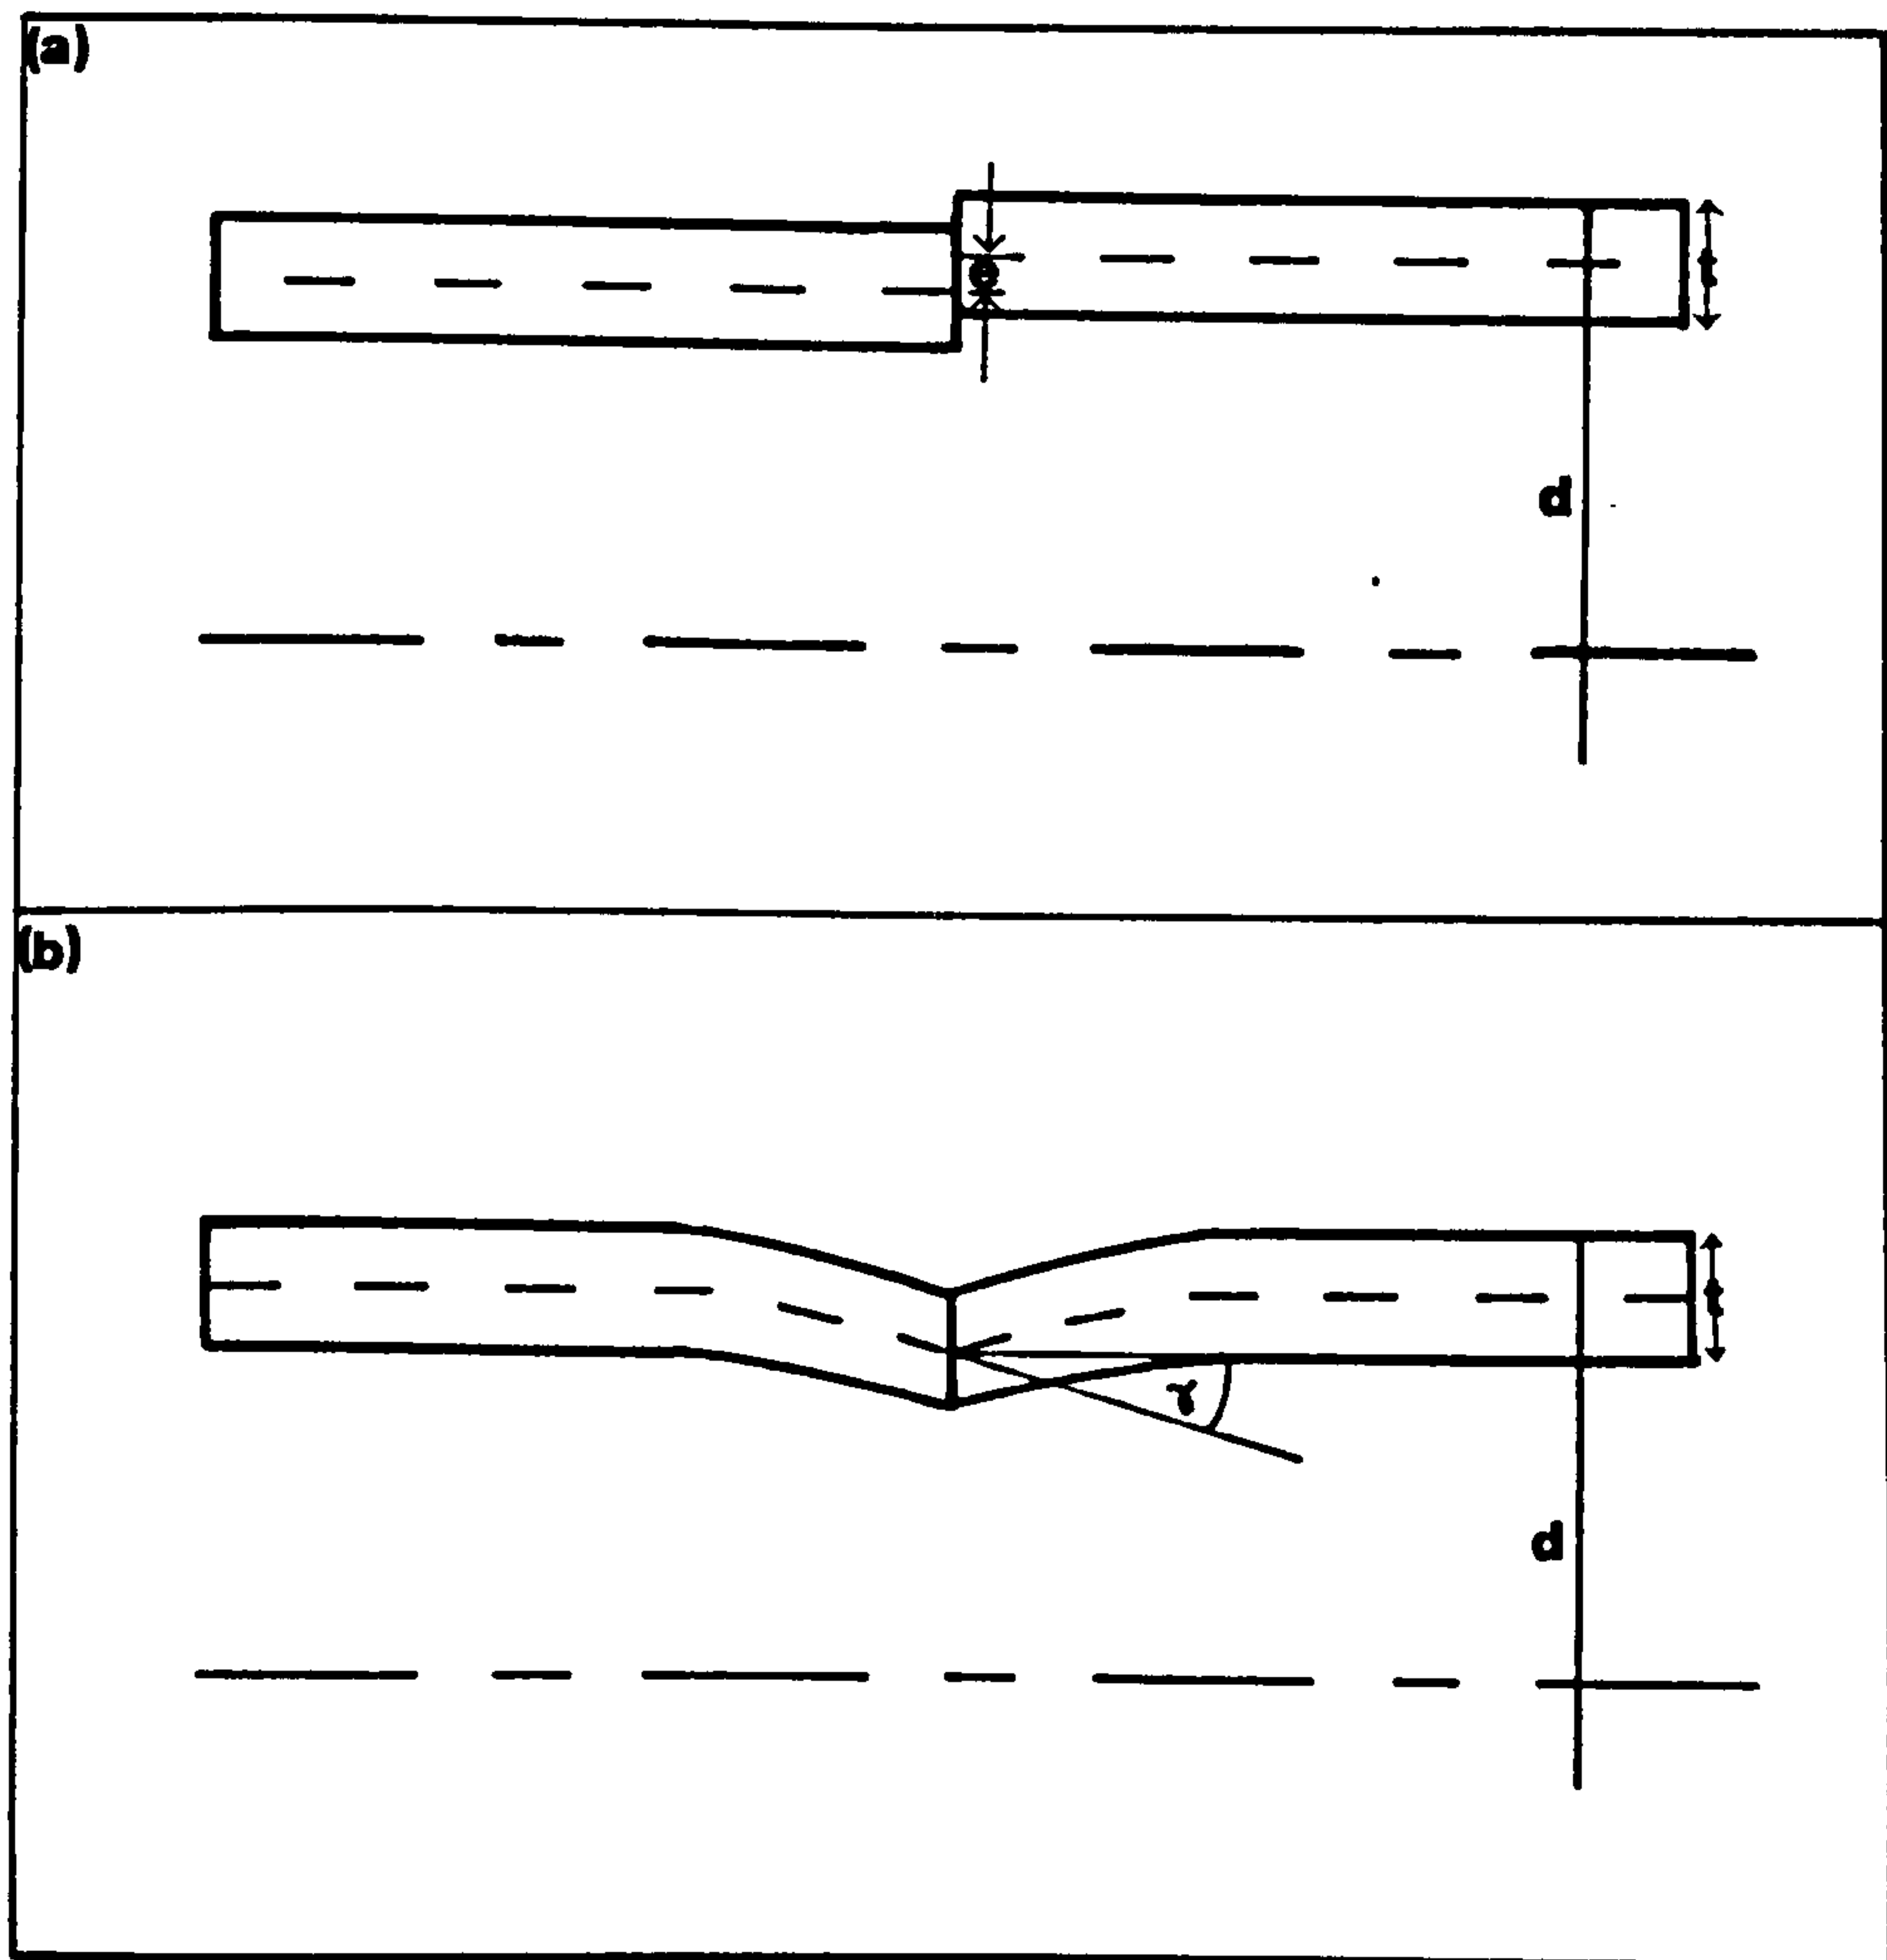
Geometrical defects at the butt weld
